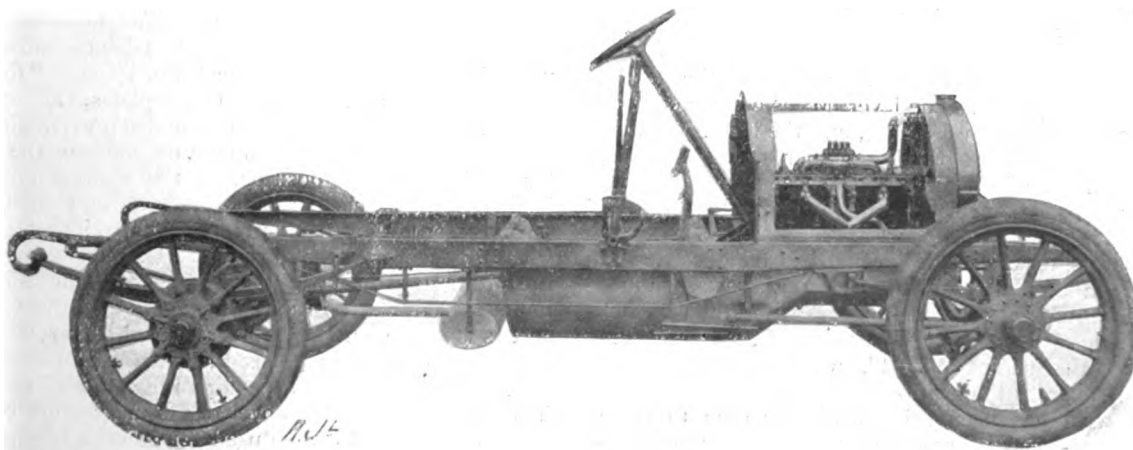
Side view of the 17-25-h.p. Hotchkiss Chassis, showing the trussed frame, and the metal sheeting under the gear-box.
